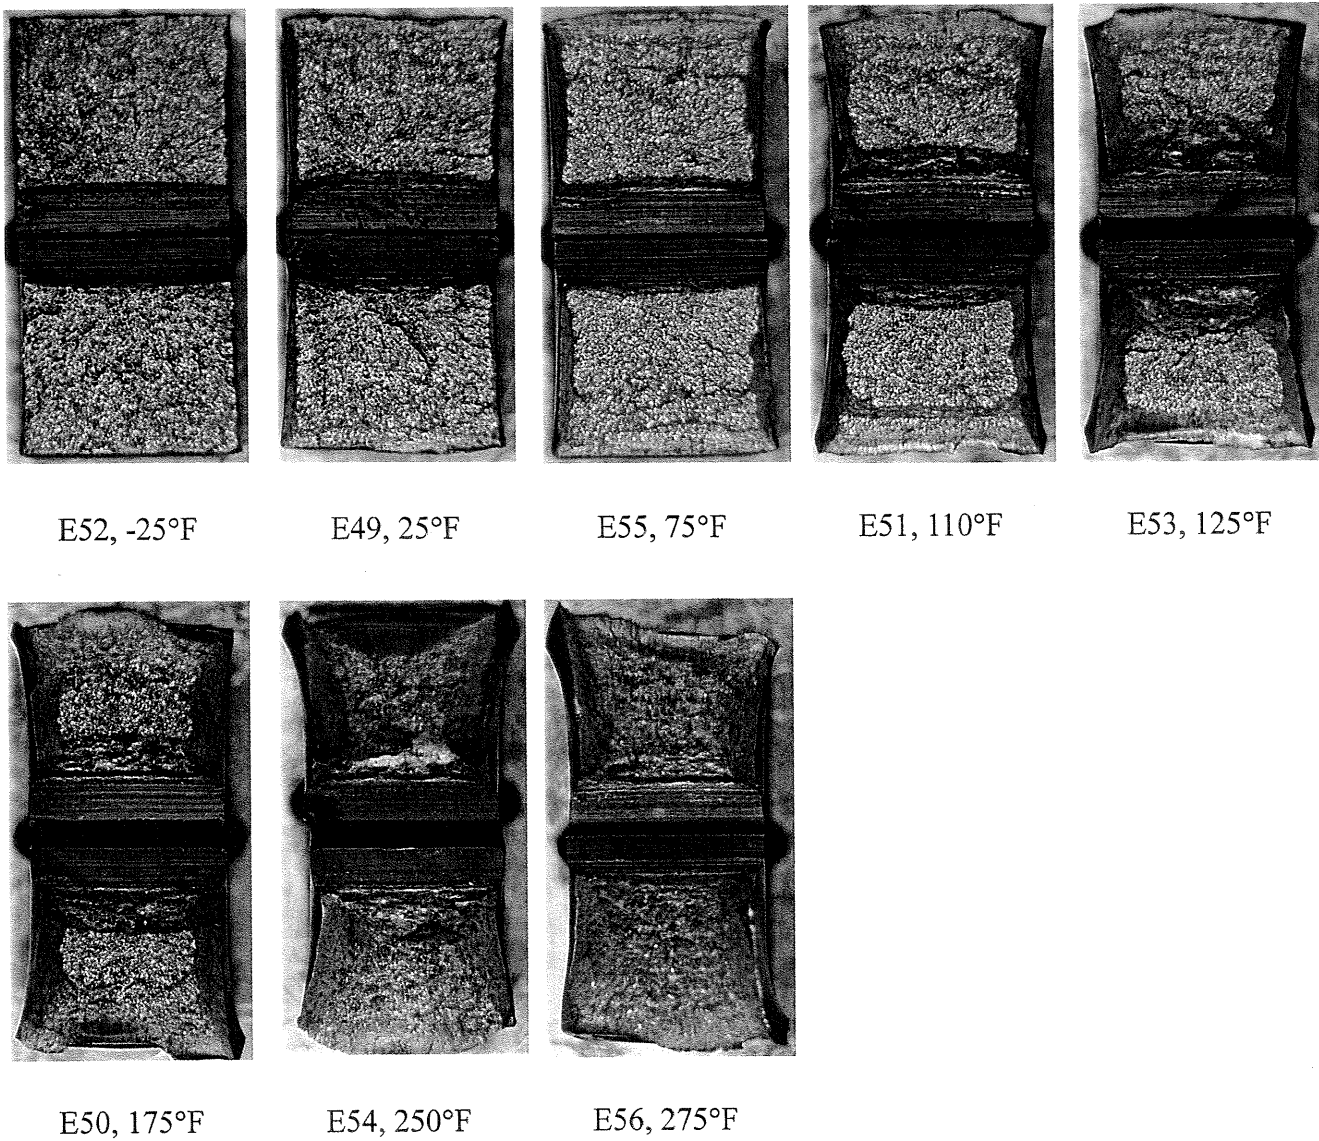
Charpy Impact Specimen Fracture Surfaces for Diablo Canyon Unit 1 Reactor Vessel Intermediate Shell Plate B4106-3 (Longitudinal Orientation)
